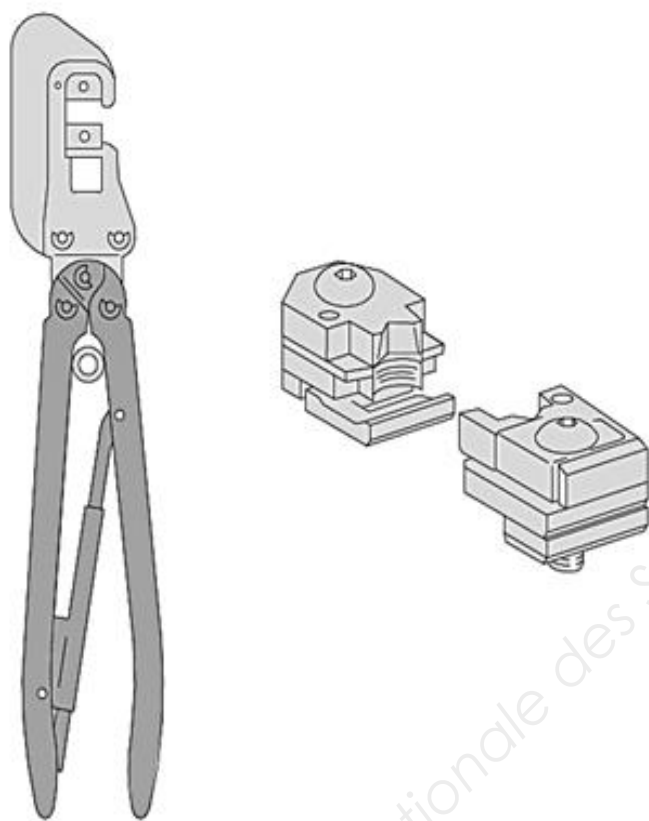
(Sheet 1) / 20-25-22 - Crimping Tool-AMP P/N 69710
